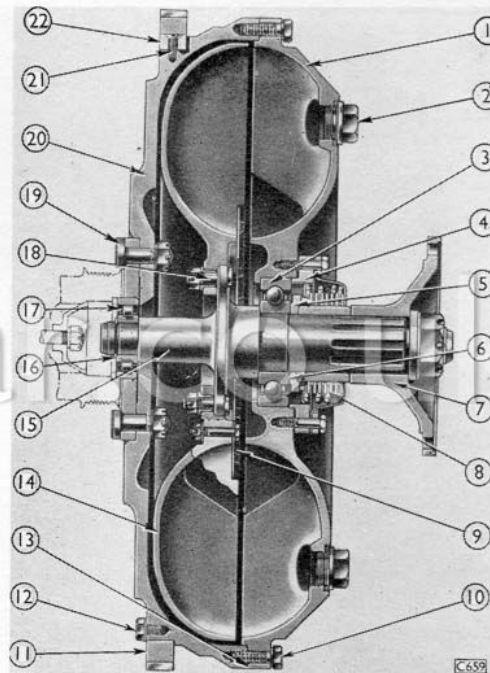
Section through fluid coupling and bellows gland oil seal.
